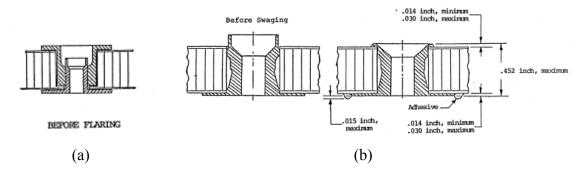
Flanged Insert (a) One-Piece and (b) Two-Piece
